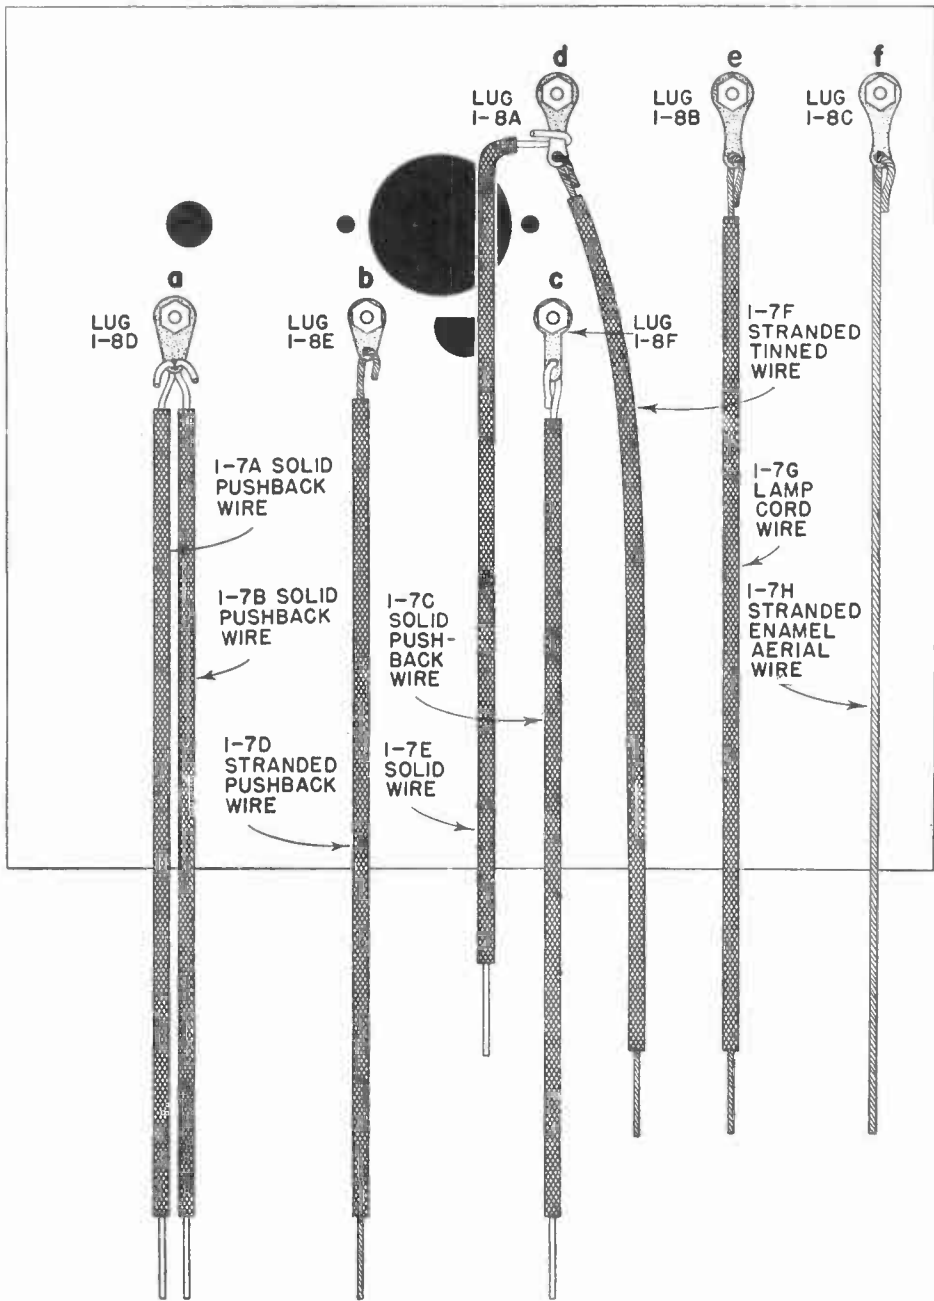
Appearance of bottom of chassis after completion of Experiment 6. The actual soldering, of course, is not shown here. Each of the soldering lug connections commonly used by radio men is included in this experiment.
